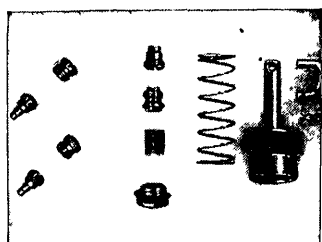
Assemble parts for pump circuit. Replace both spring and leather if leather shows wear or damage. Test checks by blowing from operation
